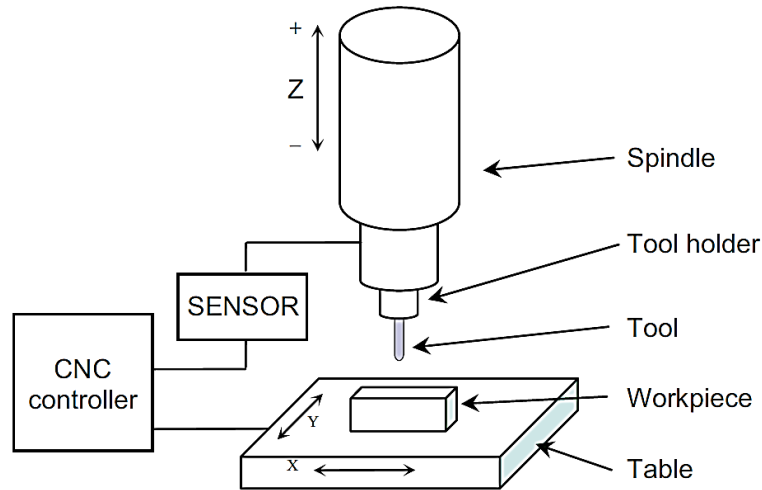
The general principle for detecting the tool-workpiece contact[28].
